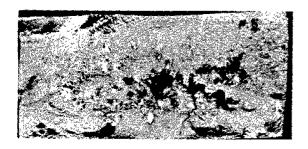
FRACTURE SURFACES OF WELDS WITH CLUSTERS OF POROSITY
